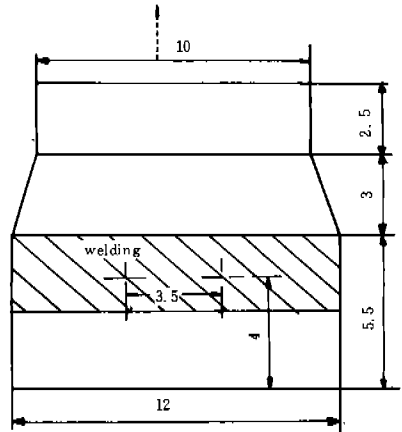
Specimen dimension of artificial flaw in circular tube welding
